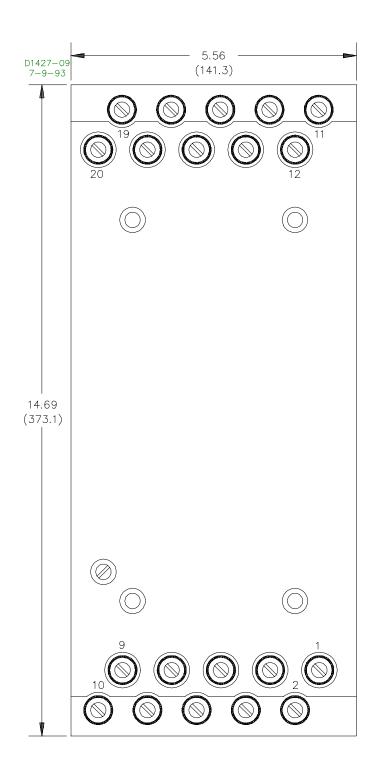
M1 Case, Projection Mounting, Outline Dimensions, Rear View
